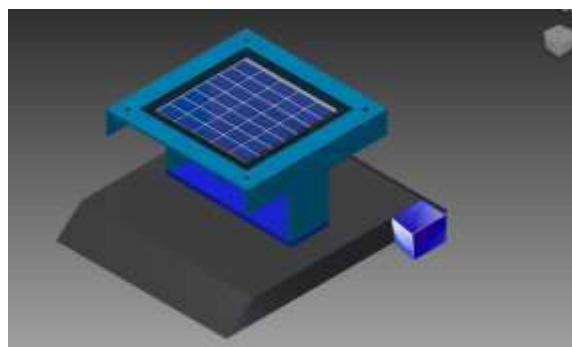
3D Drawing of Dual-Axis Solar Tracker
